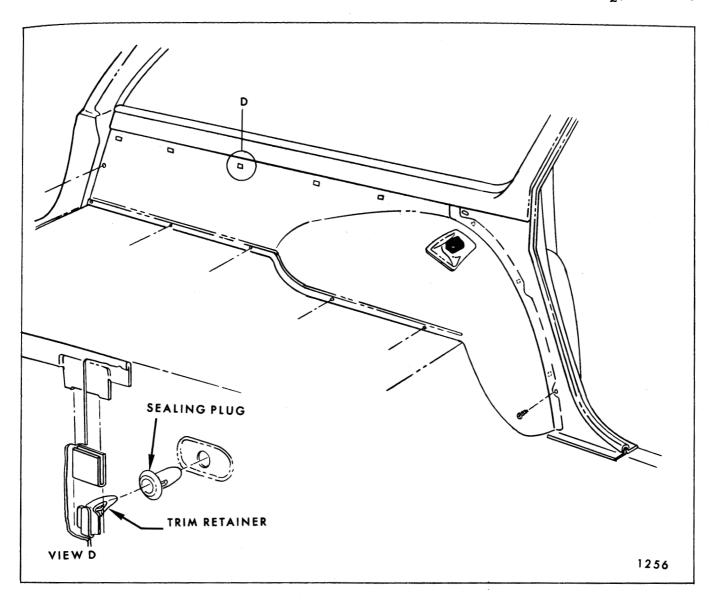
Rear Quarter Trim Panel, Left Side - Pontiac 23335 Style
